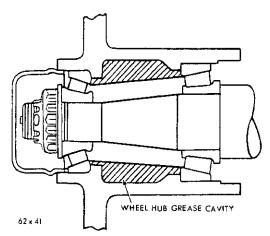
Fill Cavity with Wheel Bearing Lubricant
